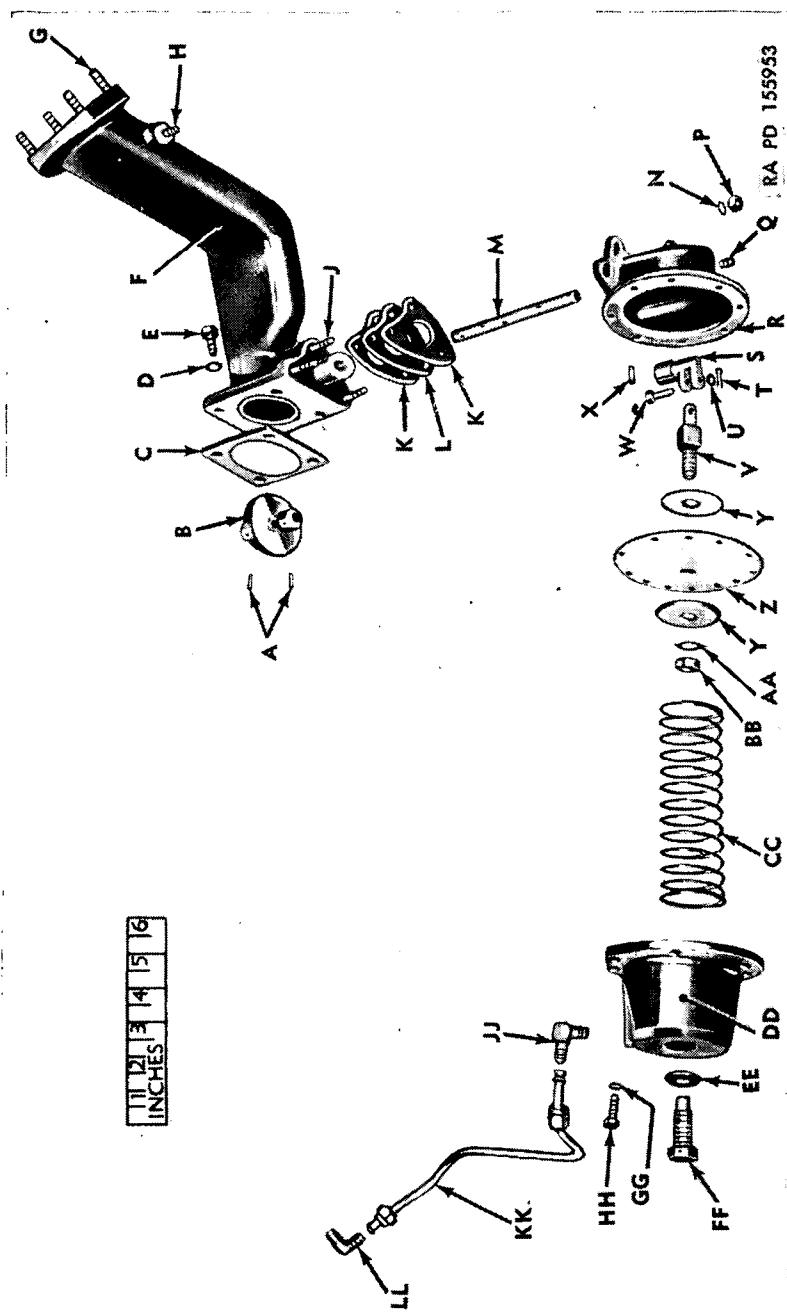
Hotspot outlet housing and vacuum heat control lever assembly—exploded view.
